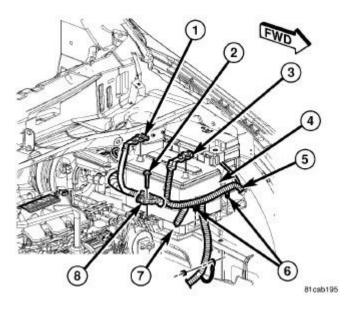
CONVENTIONAL BATTERY REMOVAL Courtesy of CHRYSLER LLC
